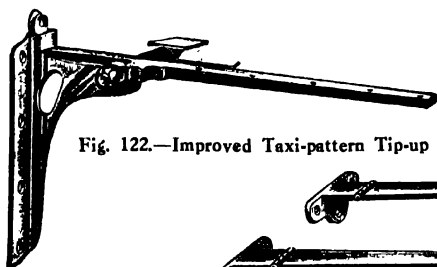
Improved Taxi-pattern Tip-up Seat.
